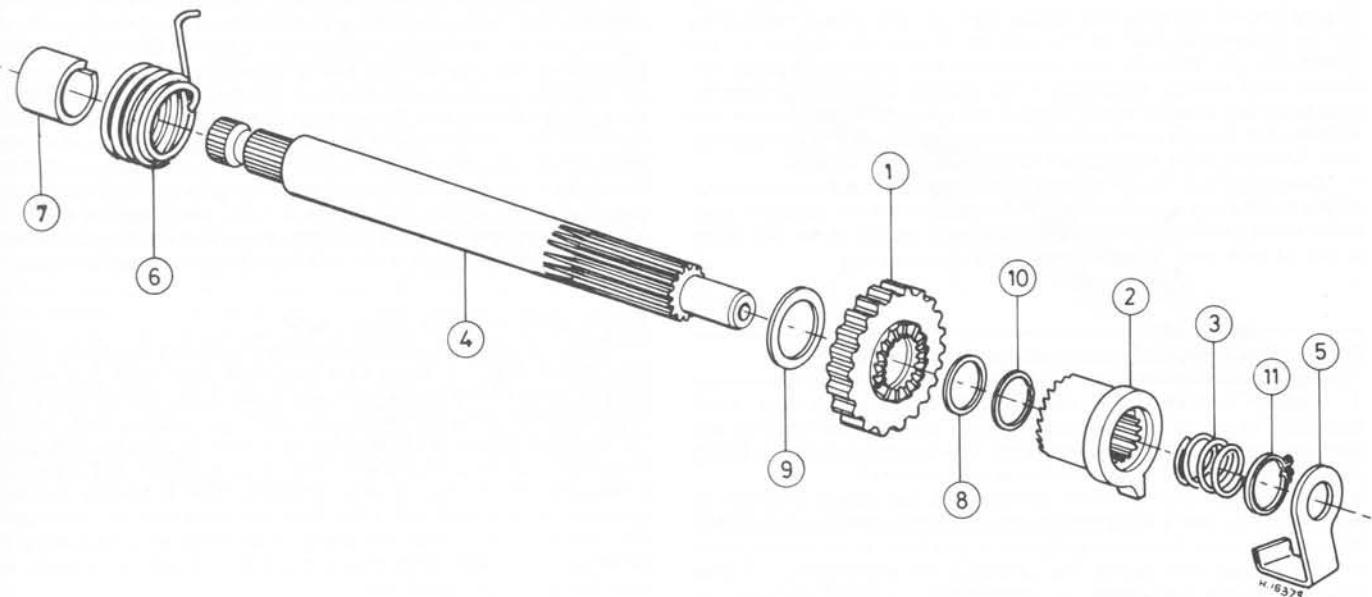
Kickstart assembly – CB125 T, T2, TA and TB
